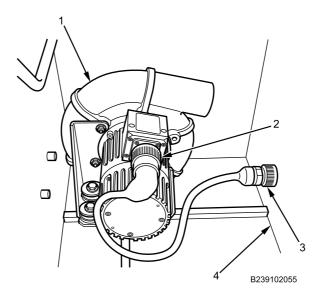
HVAC/LSS Main Blower Motor Wiring Harness.
